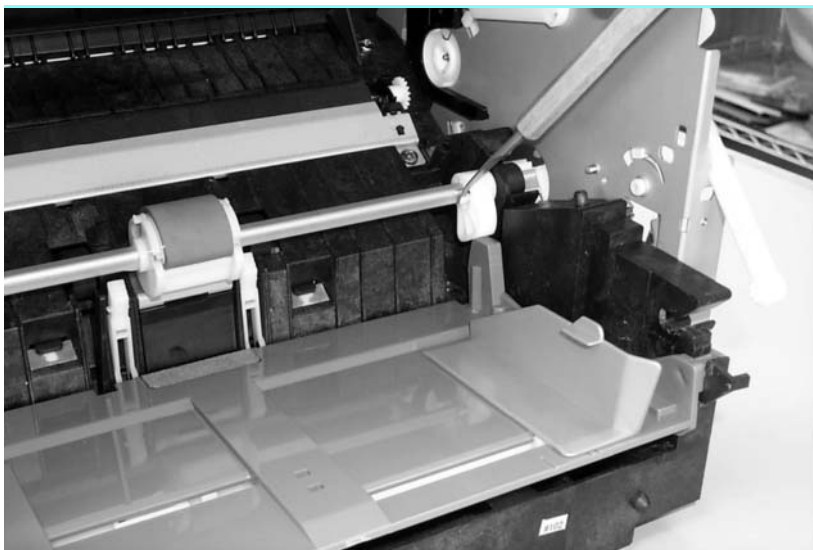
Removing the paper lift-plate assembly (1 of 3)
